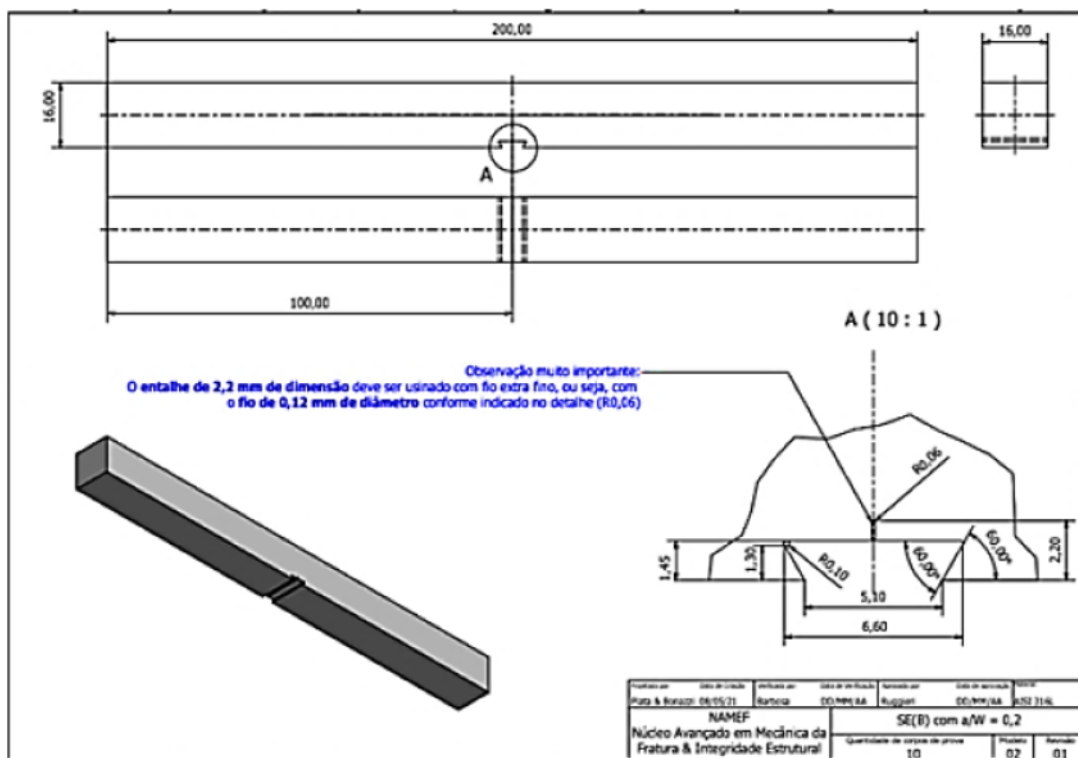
Geometry and dimensions of the SE(B) specimen of stainless steel 316L material.
